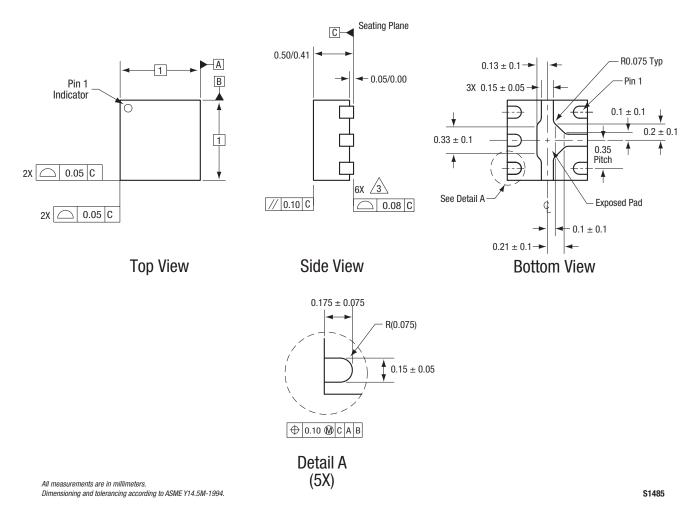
SKYA21012 6-Pin QFN Package Dimensions
